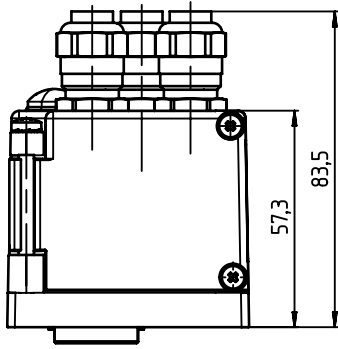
Dimensioned drawing BPS with ME 338 103 connection hood
